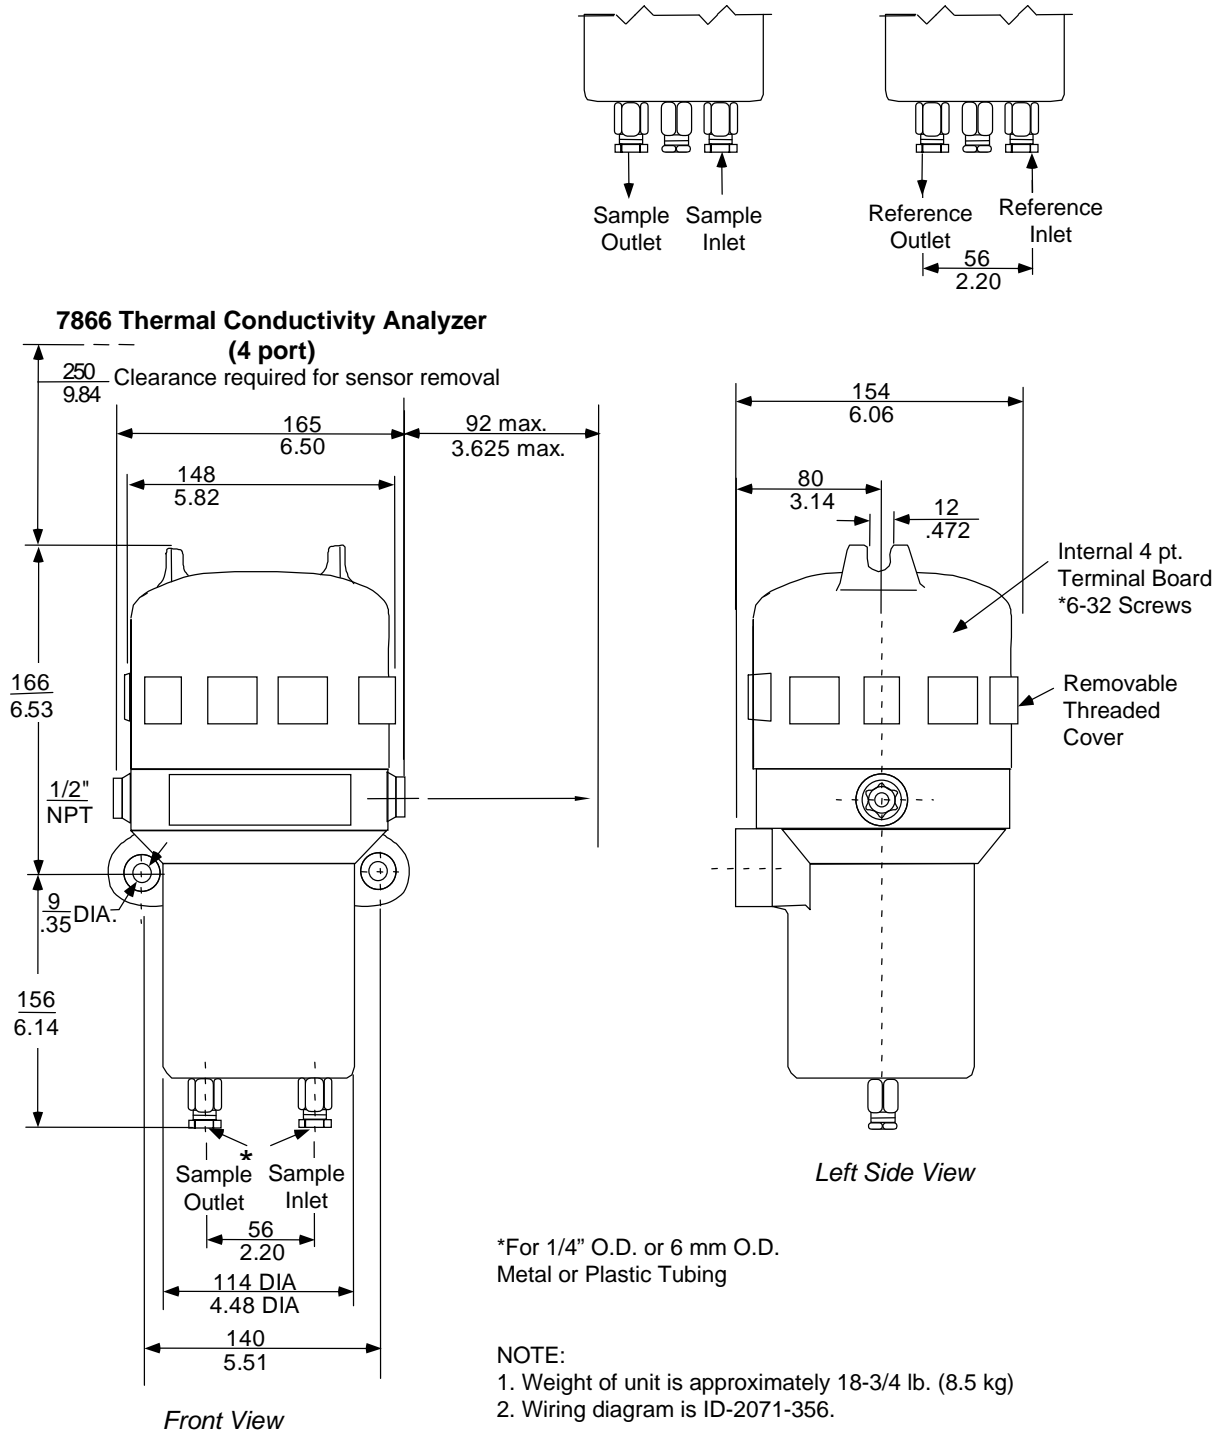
7866 Sensing Unit Mounting Dimensions
